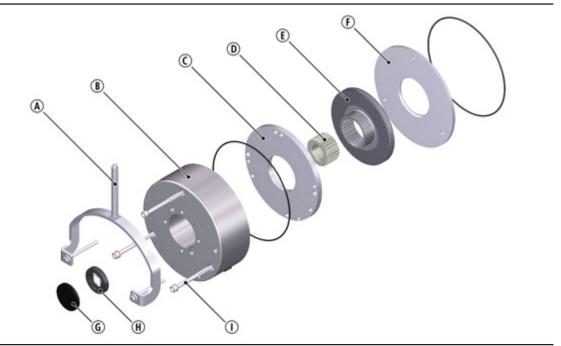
Spring-applied brake INTORQ BFK470-06 to 18
